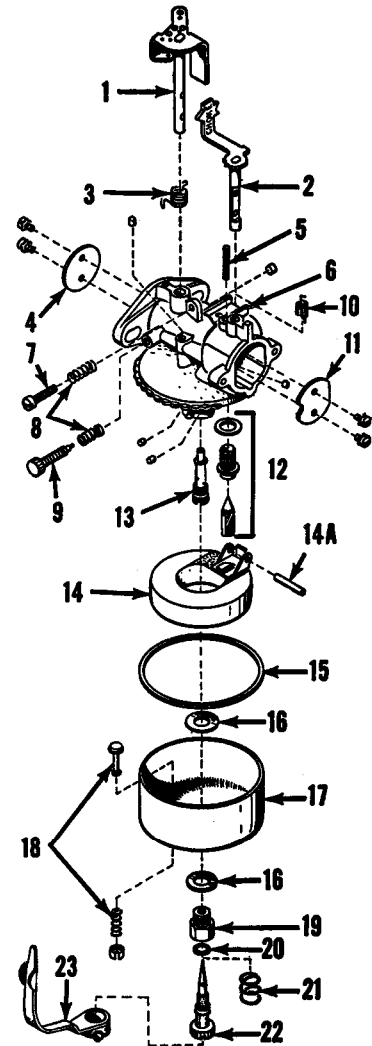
Exploded view of typical "LMG" series carburetor. "LMV" and "LMB" series are similar.
